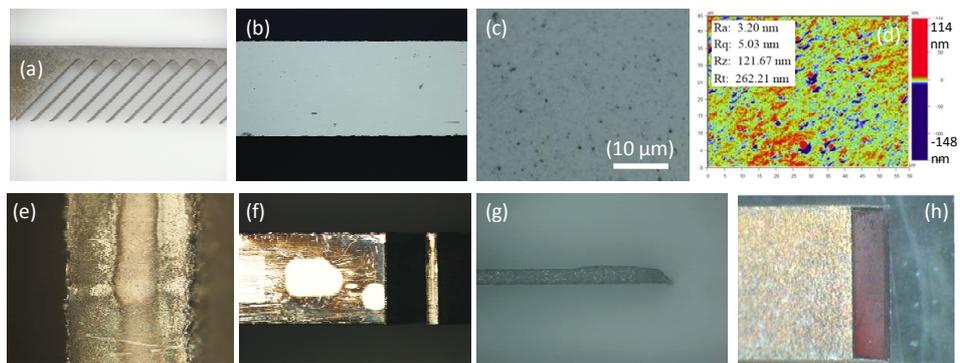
Pictures and measurements of Wire-EDM fabricated mirror plugs.
